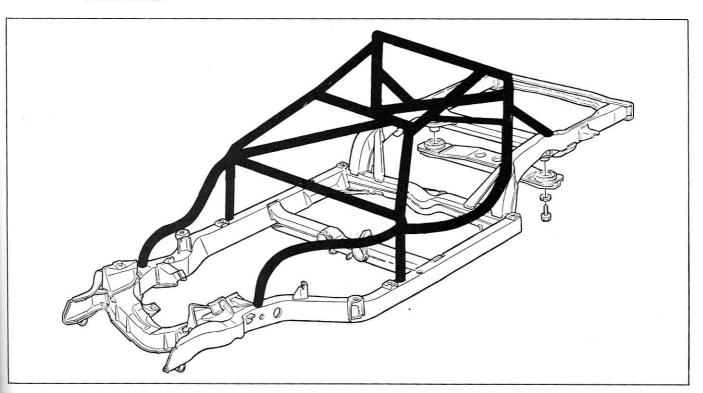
Typical roll cage welded to the frame assembly.
